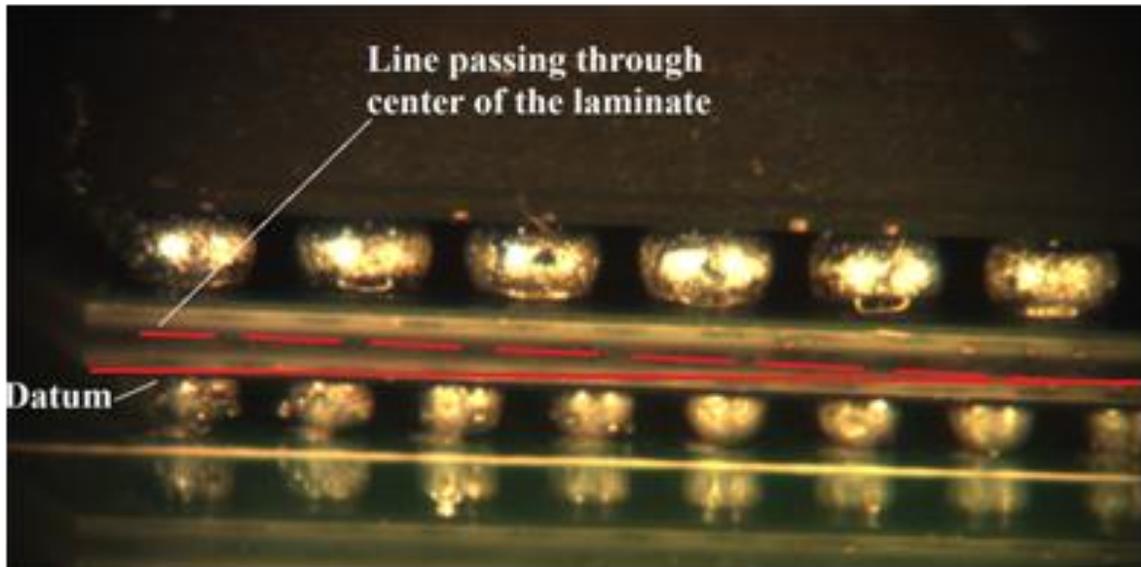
Solder reflow defect: Excessive warpage and tombstoning resulting in open connections
